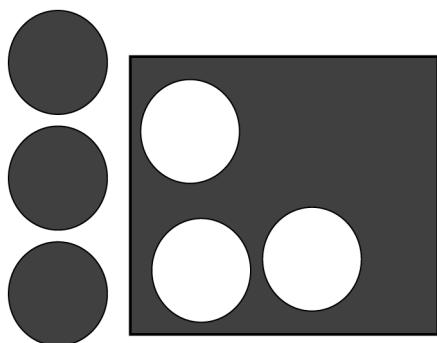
38 mm disk specimens cut from a sheet of material using a circular cutting die.
